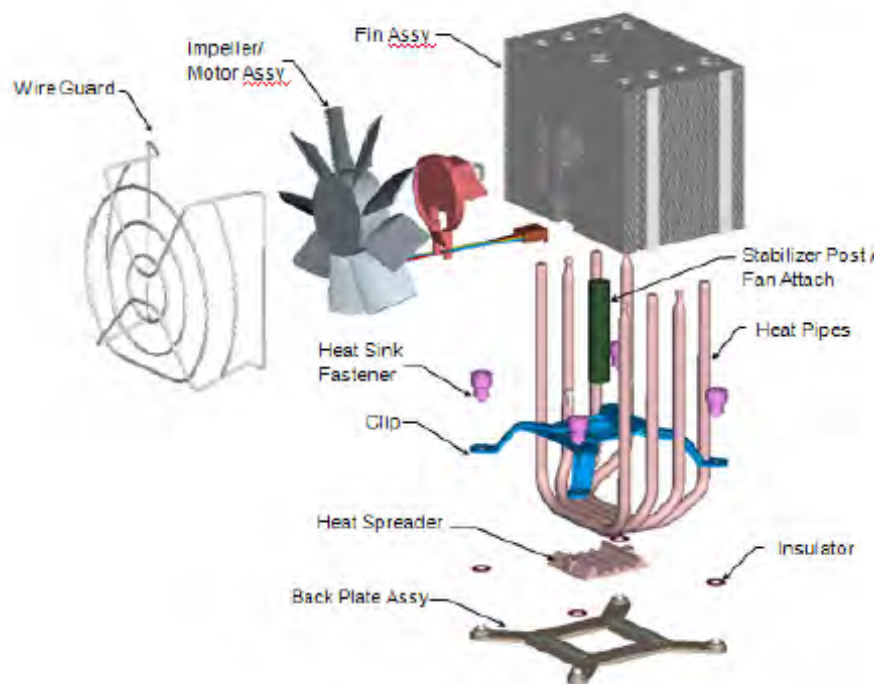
Reference heat pipe thermal solution assembly for i7 processor
